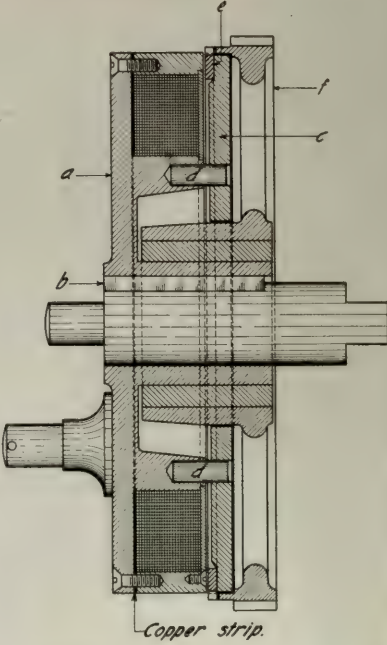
Details of Gears and Clutch Ring of Style "H" Signal.
